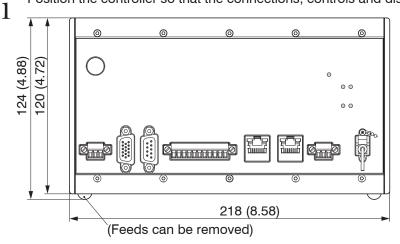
Dimensional drawing, front view of IMC5x00 controller, dimensions in mm (inches)
